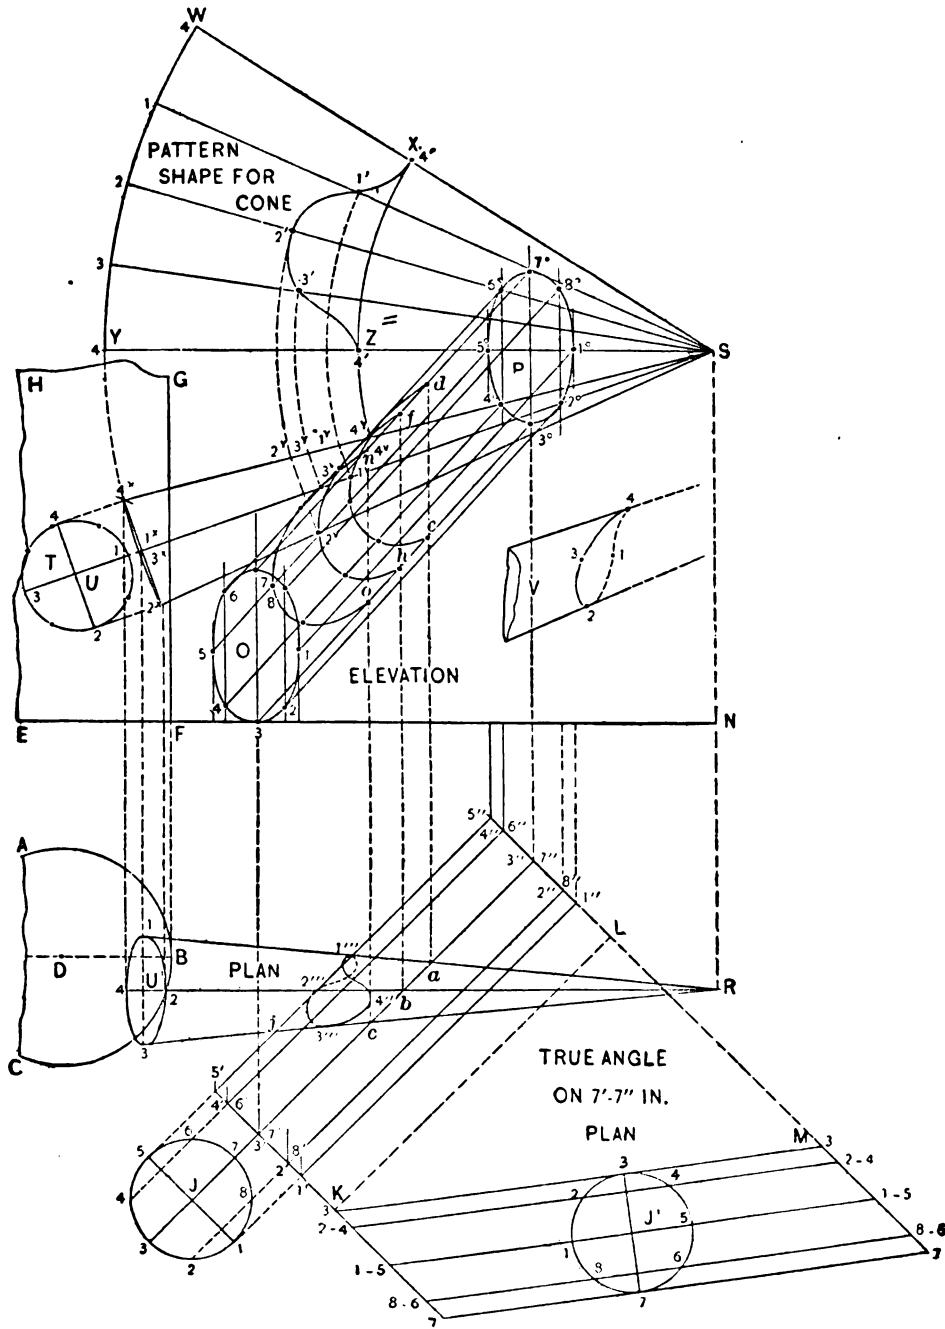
Plan, Elevation, True Angle, Sections and Pattern
